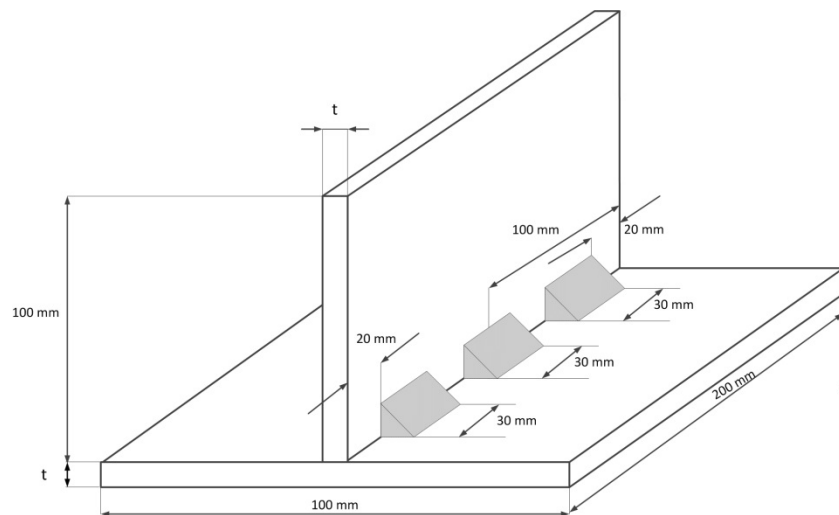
Dimensions and types of test assembly for fillet tack welding
